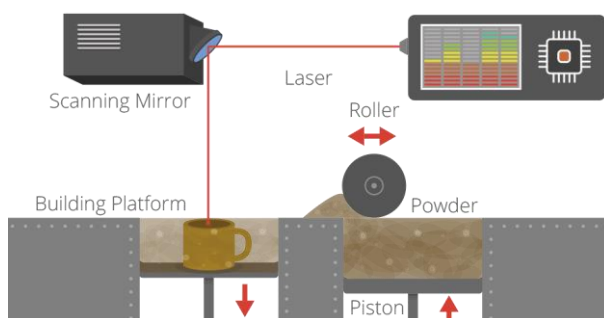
Scheme of Selective Laser Sintering /Melting [3]
